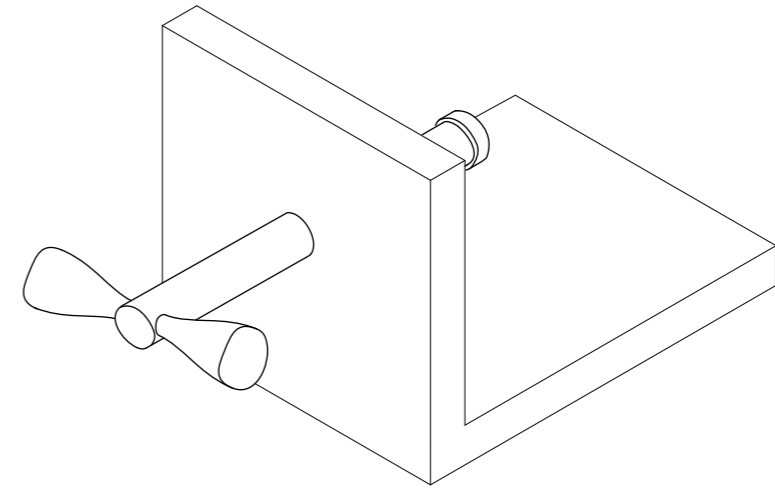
Detail 3. Opening detail reconfigured as a clamp. Used together with the wooden frame in Table 1 to hold the module in place without damaging the marble. Author's drawing.
